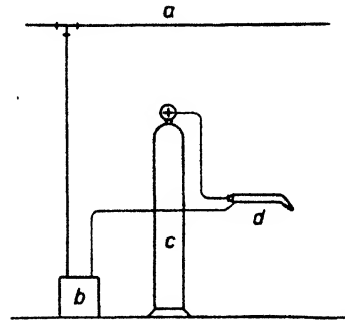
Lay-out of an illuminating gas welding plant
